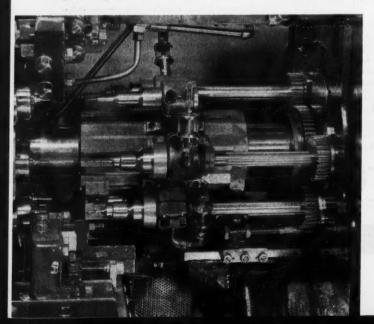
High Speed Drilling Attachments in Use on Acme Multiple Spindle Automatic Machine
